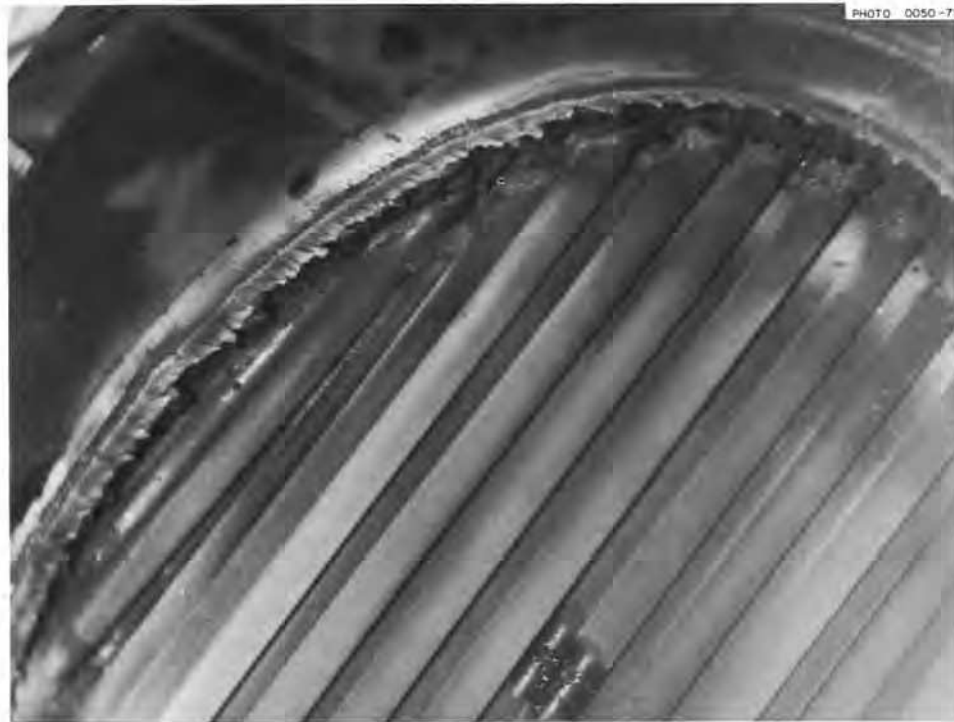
Opening in primary heat exchanger, showing cut made with plasma torch and exposed tubes.
